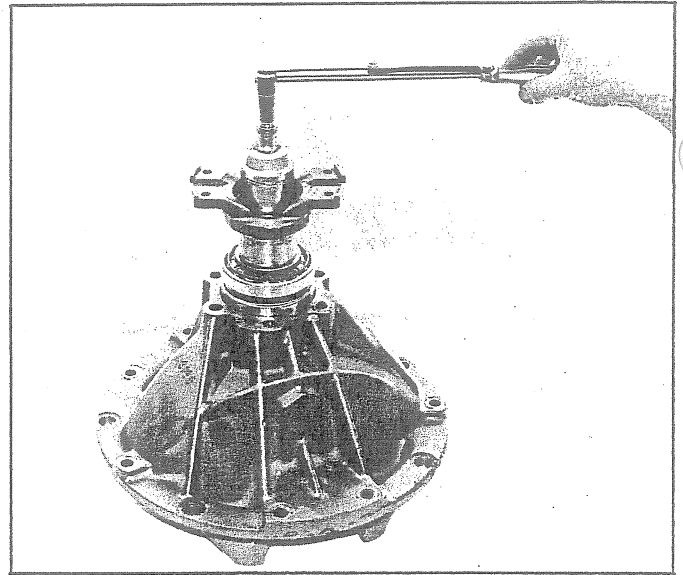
Checking Preload of Pinion Shaft Bearings
